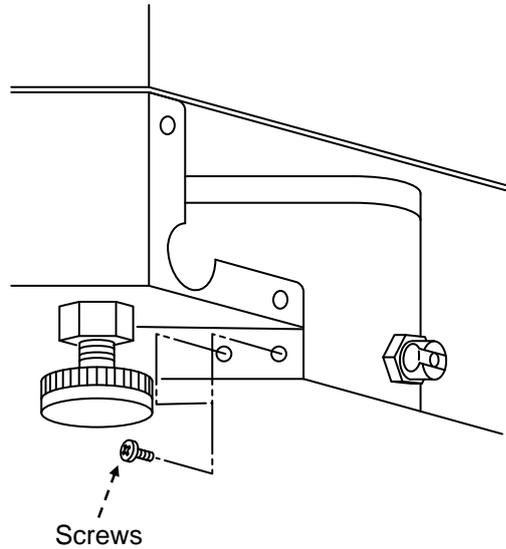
Removing the screws holding the water level sensor container of the water tank
